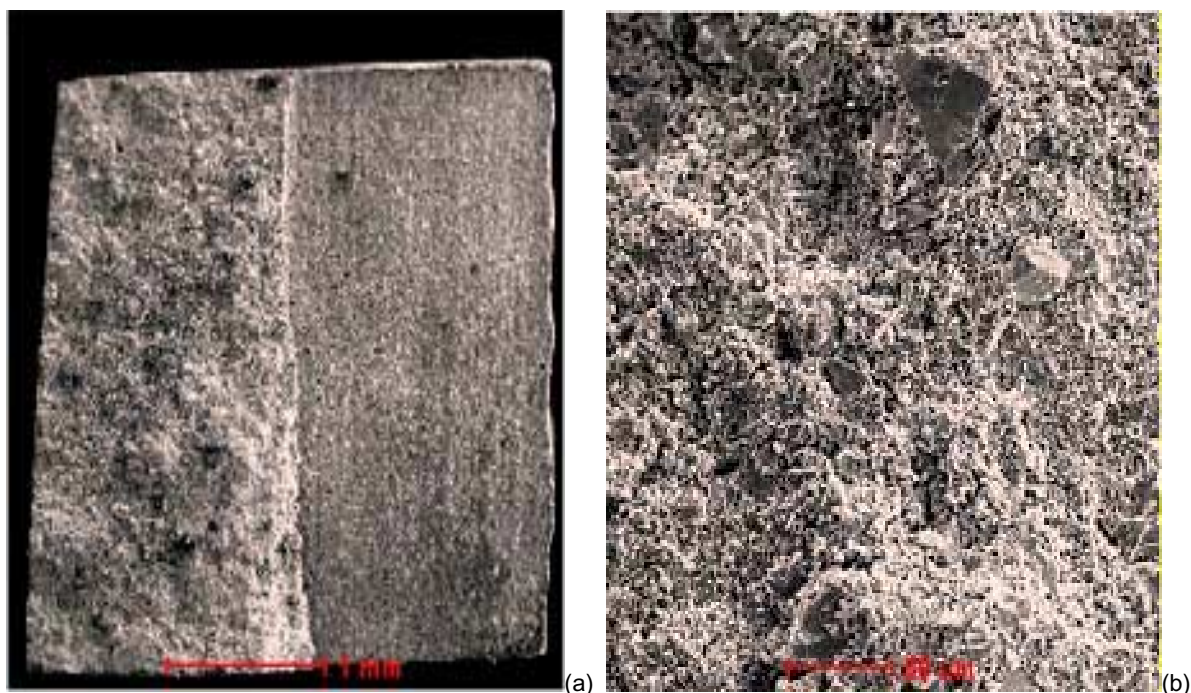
Fracture surfaces of a sample tested at 72%K_{IC}. (a) 80x; (b) 400x.
